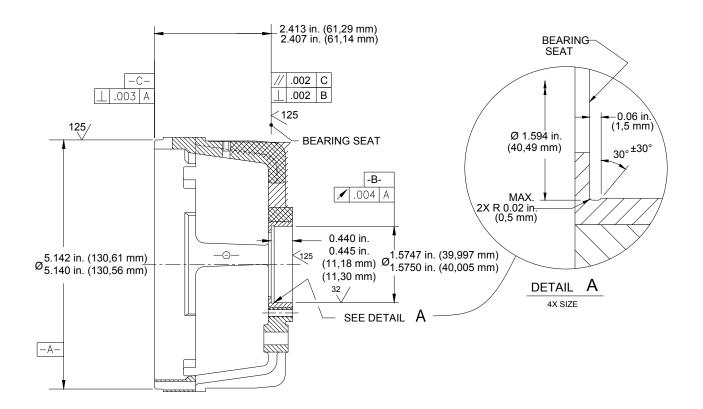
Anti-Drive End End Bell Bearing Liner Machining Specifications (IPL 10002, P/N 23081-3365)
